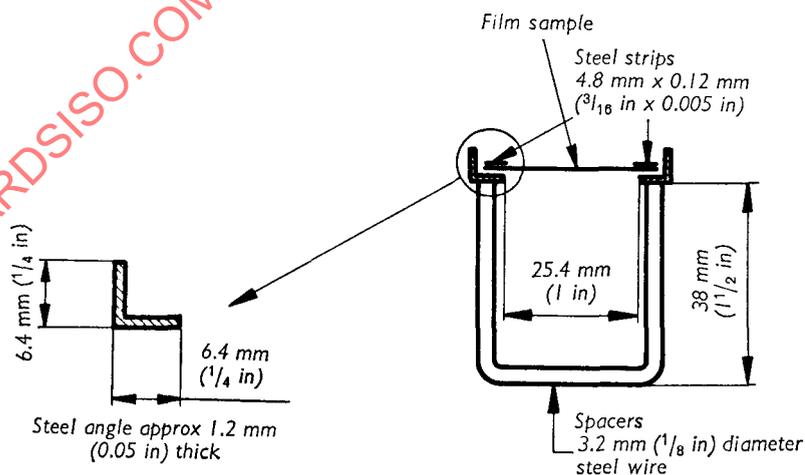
Section through supports showing wire spacers for 35 mm film apparatus
